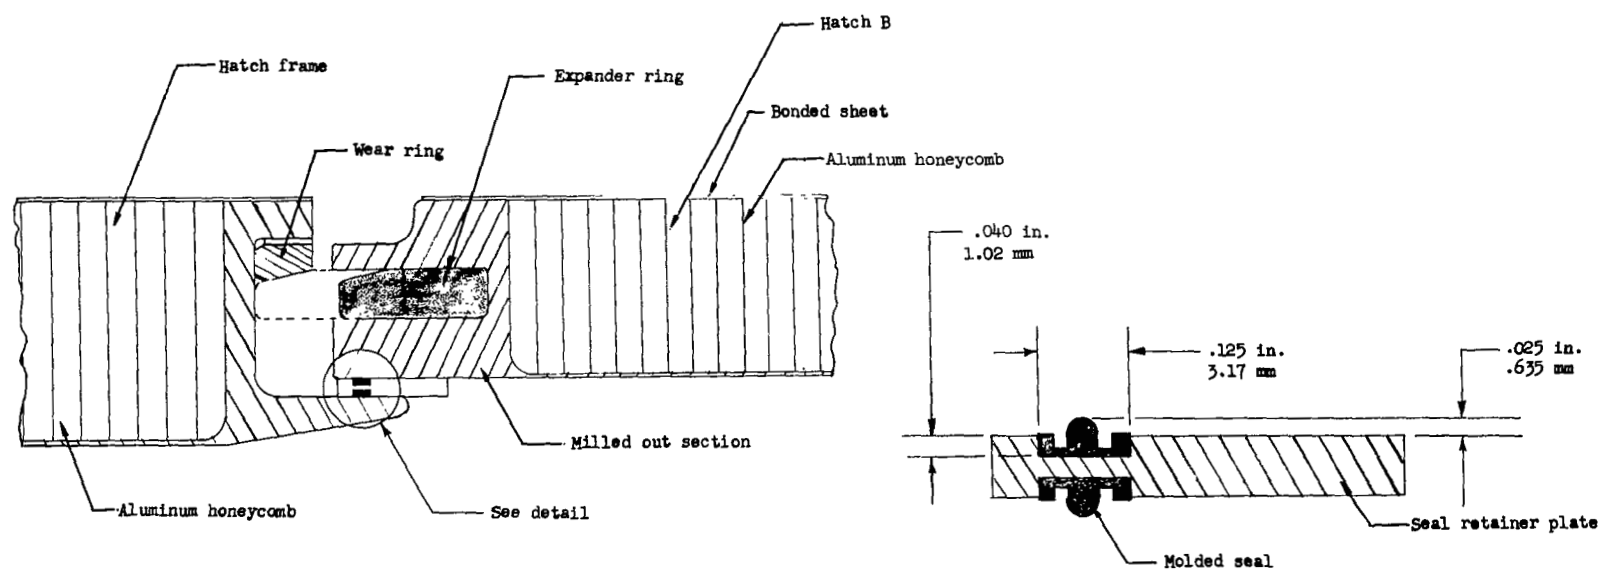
Cross-sectional diagram of expander ring and molded seal.
